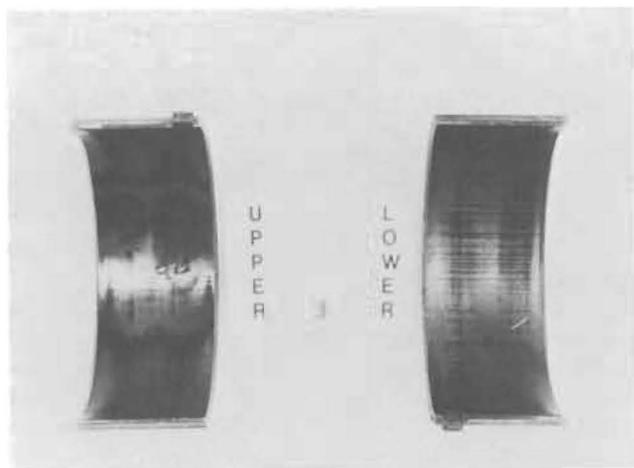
Fatigue failure and partially removed overlay on the bearing surface of the #3 upper rod bearing after 604 hours of engine operation with a 50/50 sunflower oil/diesel fuel mixture.
